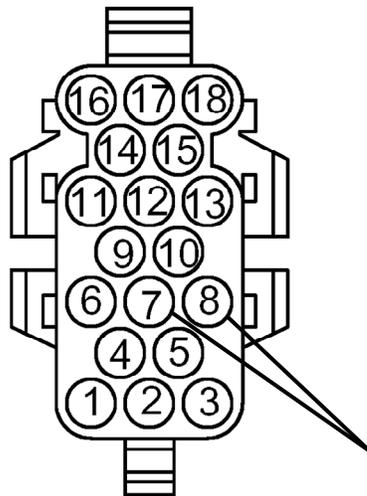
Main Connector (Front View) - Microswitch Pinout
